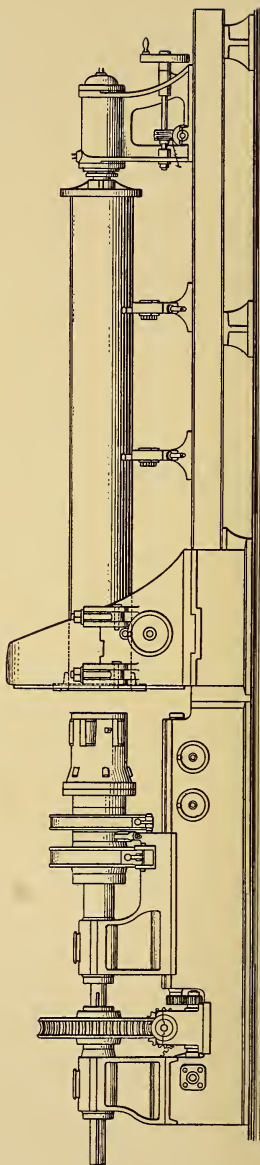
TYPE OF EXPANDING AND FLARING MACHINE FOR PUTTING FLANGES ON PIPES UP TO 26 INCHES DIAMETER WEIGHT, 25 TONS
